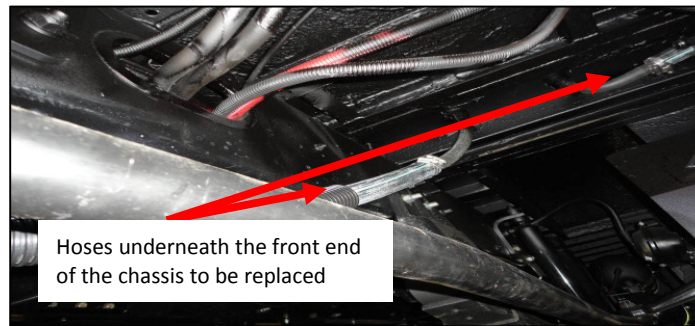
, Remove and Reinstall Hoses Under Front of Chassis
